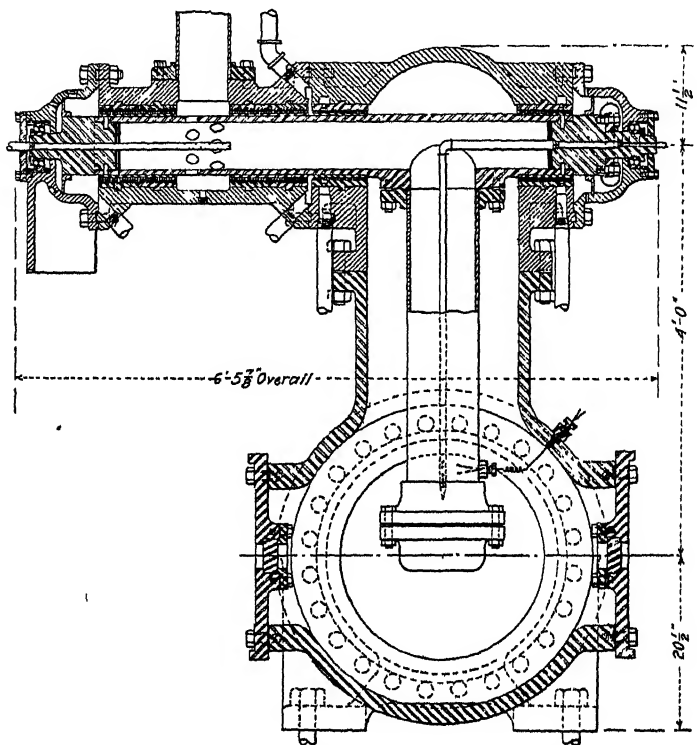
NOZZLE-TESTING MACHINE—END ELEVATION
